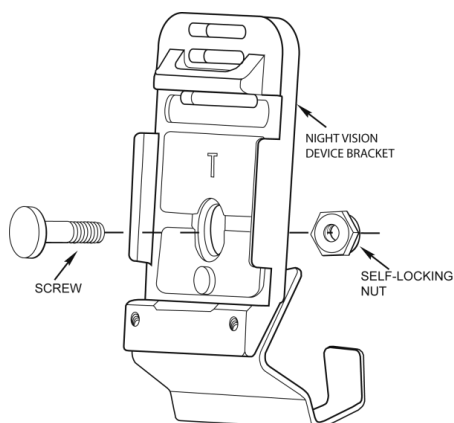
New ACH NVD Bracket Assembly with Flathead Screw and Self-Locking Nut.
